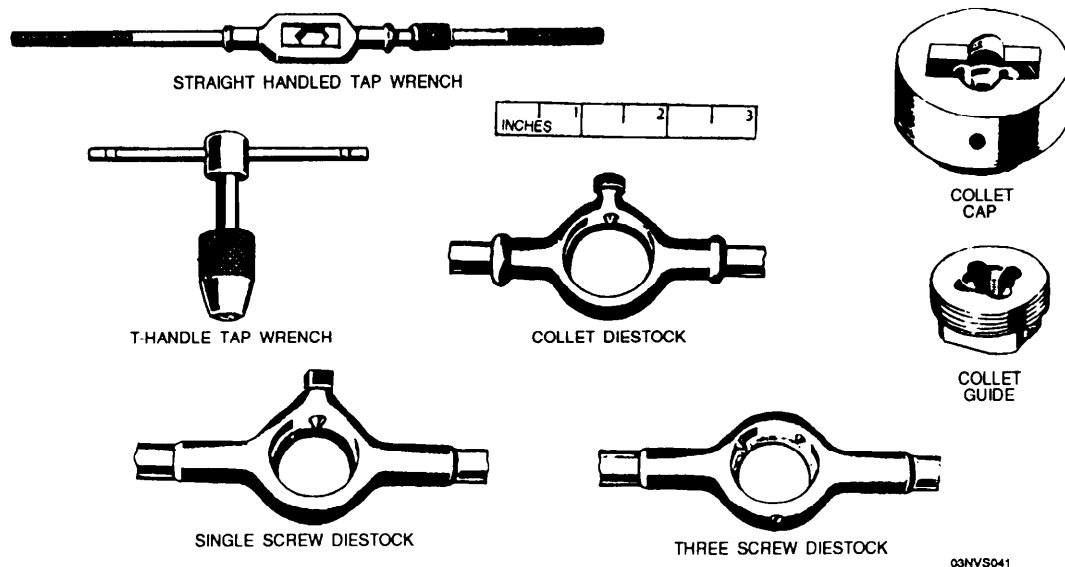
Diestocks, diecollet, and tap wrenches.
